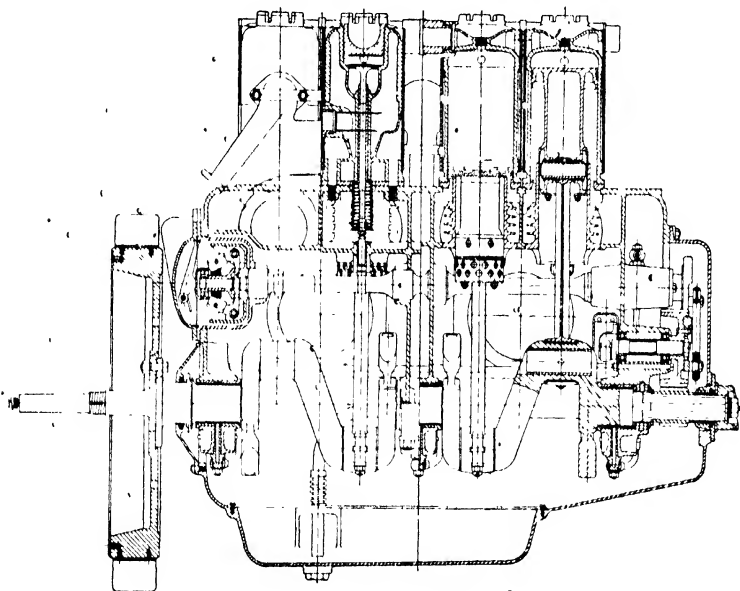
Section of Four cylinder Engine, showing Open-sided Cylinders
